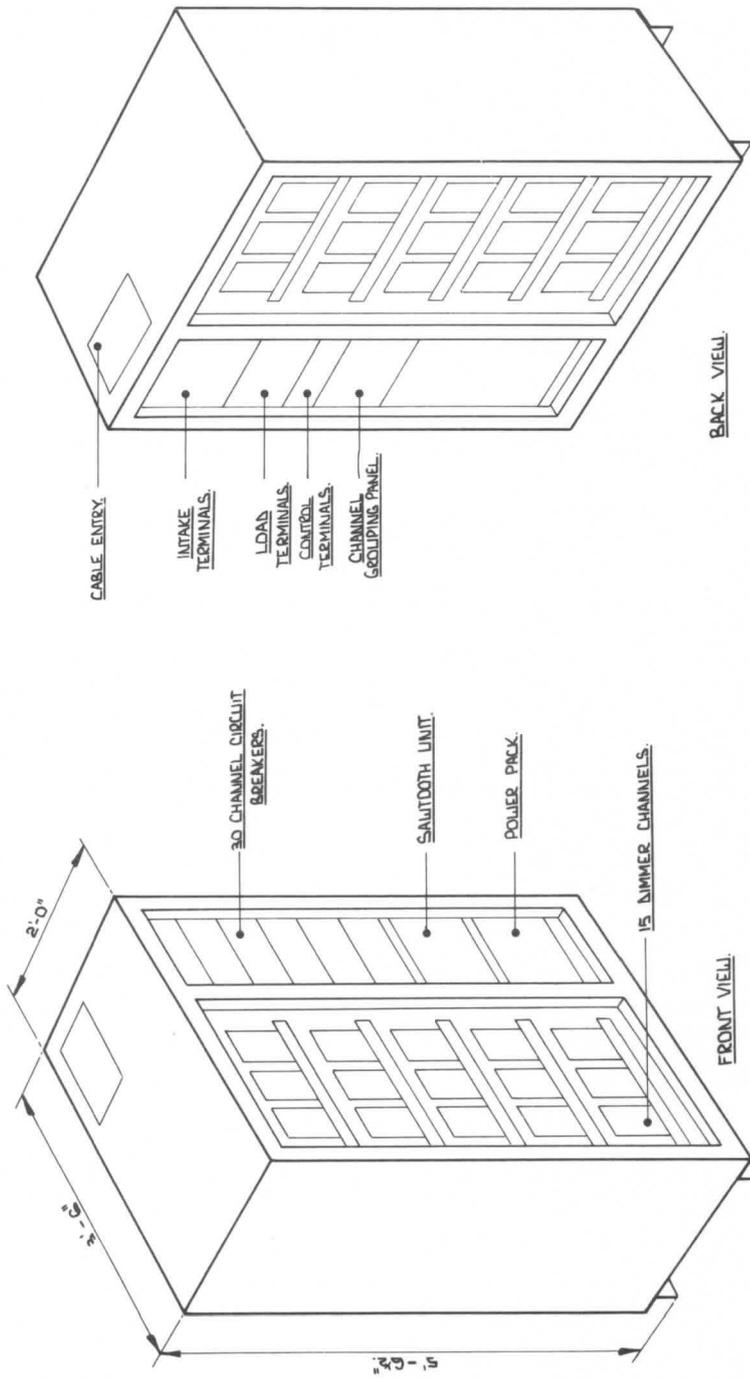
Front view and back view with covers removed to show CRD wing unit for N.T.S. Holland.
